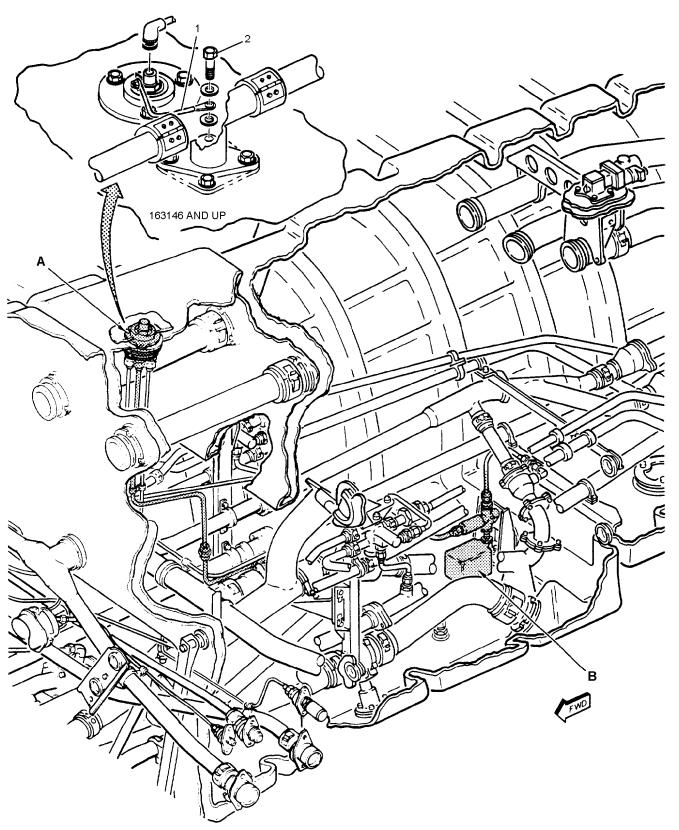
No. 4 Fuel Tank Transfer Control Valve (5L-R167) (Sheet 1)
